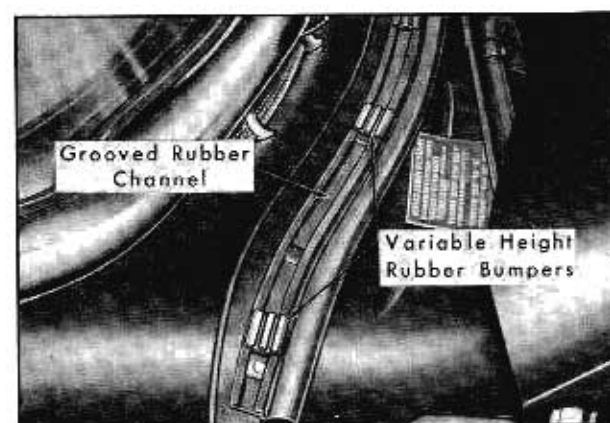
Adjusting Hood to Cowl with Rubber Bumpers
